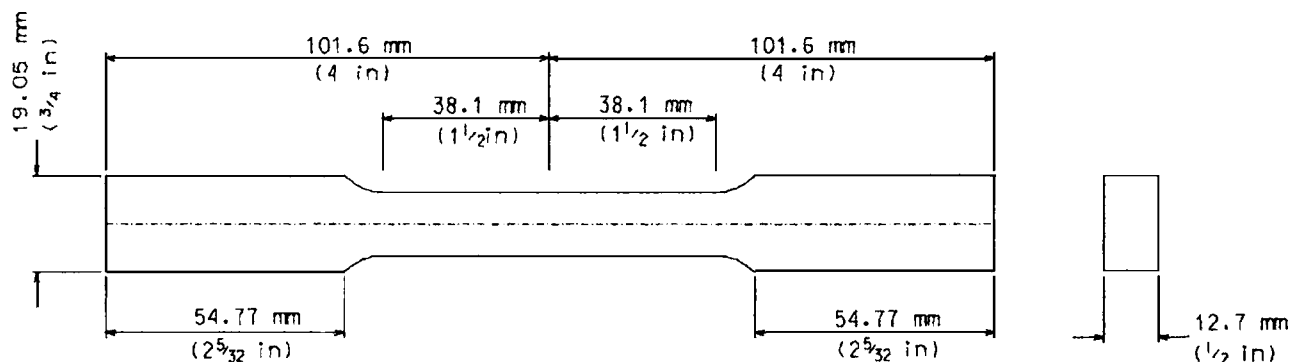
ASTM-E 8 sheet-type coupon specimen, dimensions typical for all tensile tests
